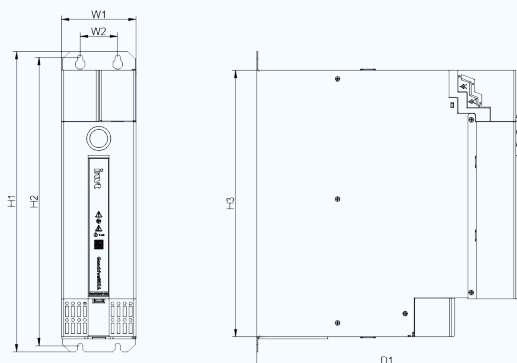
Wall mounting drawing for the 380V 11–37kW inverter unit
